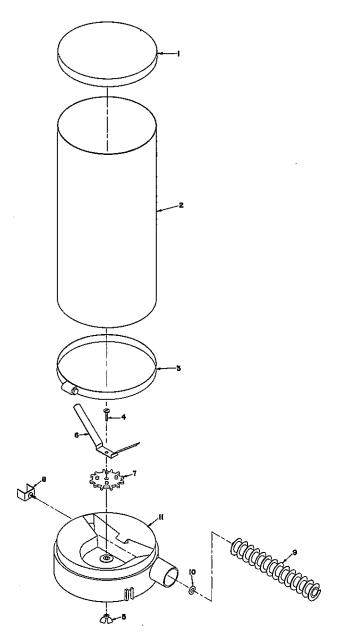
SUGAR CANISTER ASSEMBLY COMPLETE
